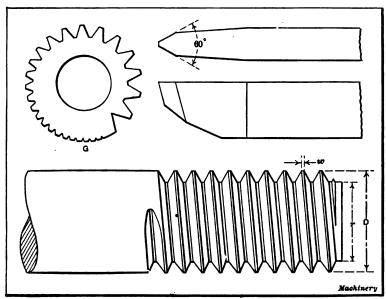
U. S. Standard Thread, Thread Tool, and Gage
